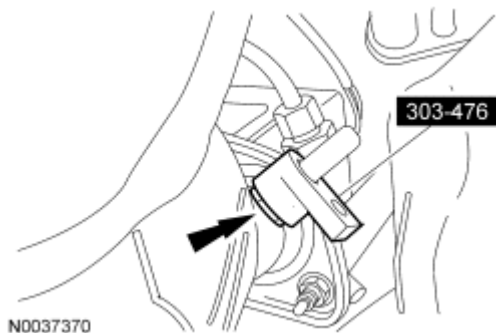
Heated Oxygen Sensor (HO2S) Special Tool
